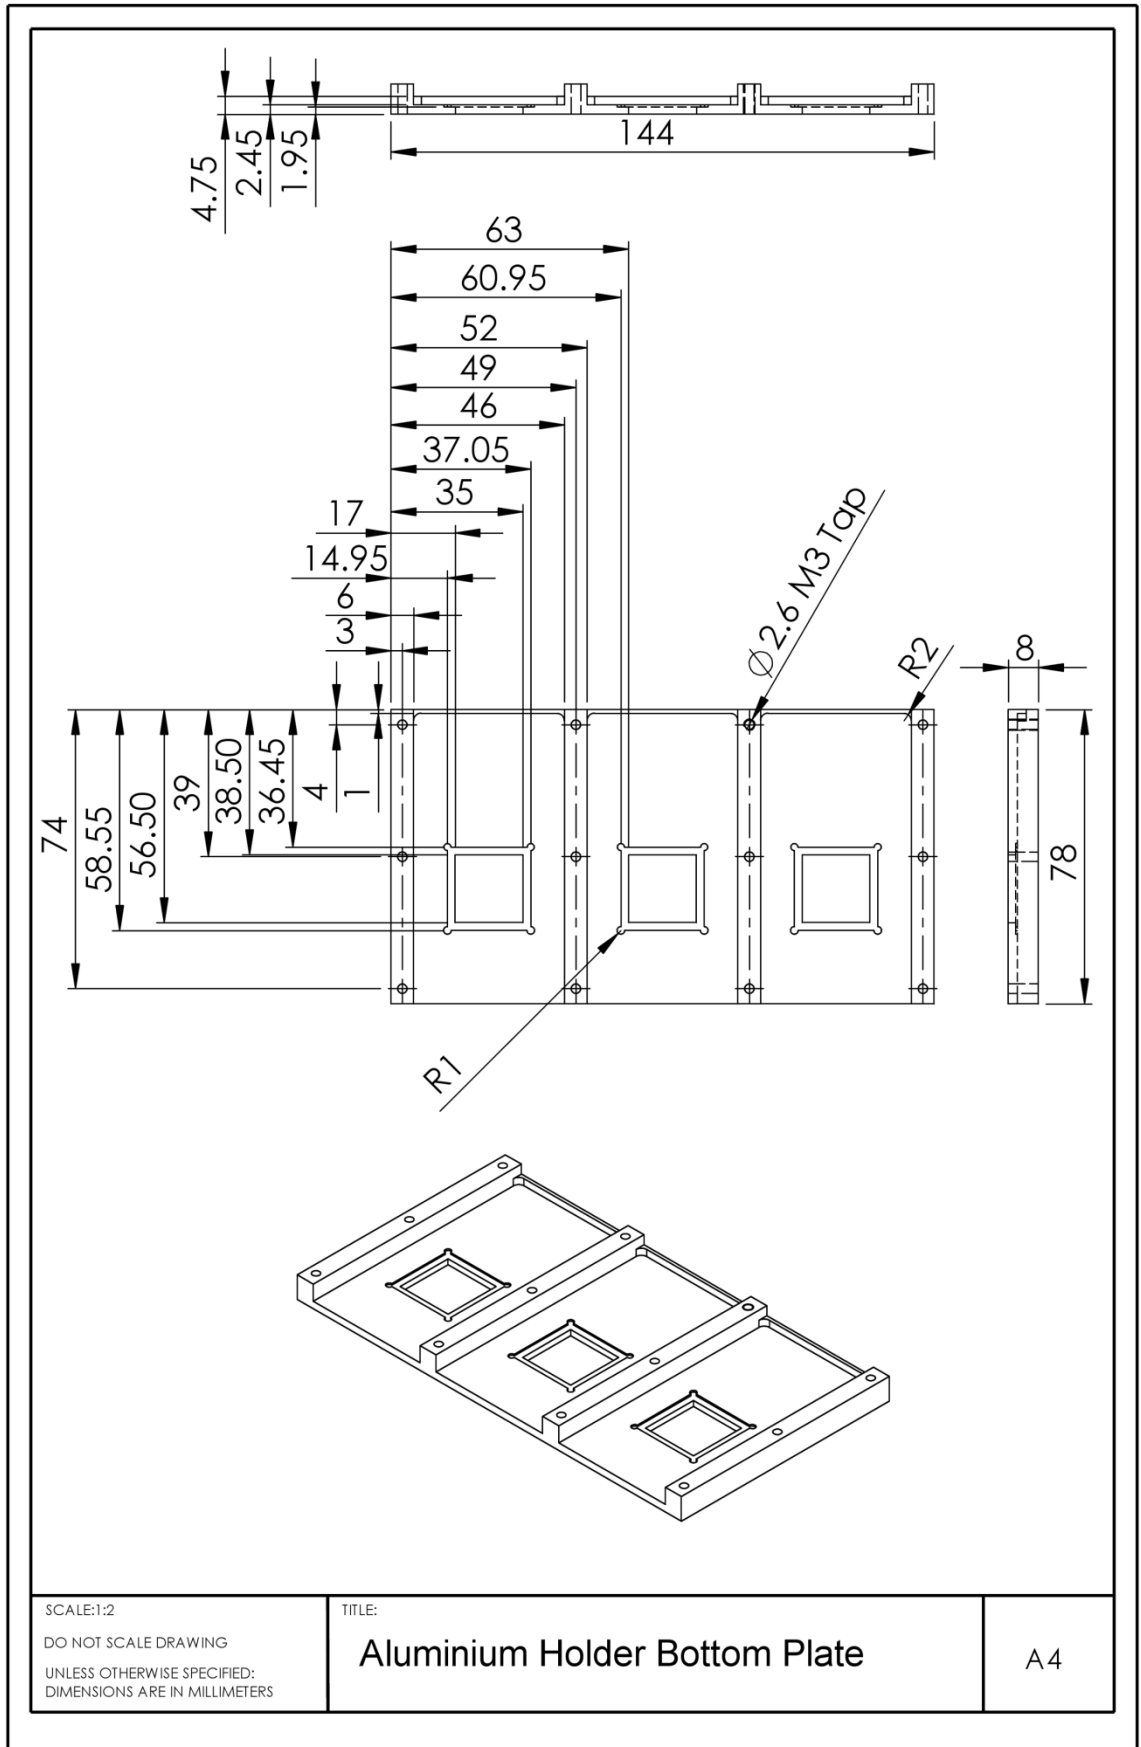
Technical drawing of aluminium holder bottom plate.
